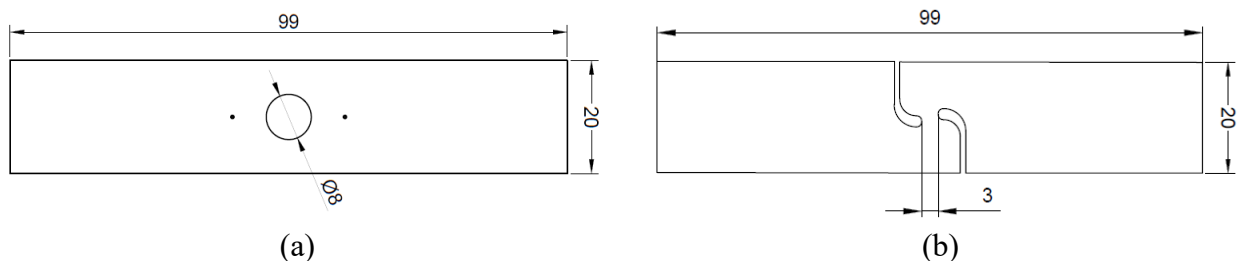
Dimensions in mm of Central Hole specimen (a) and Shear Fracture specimen (b)
